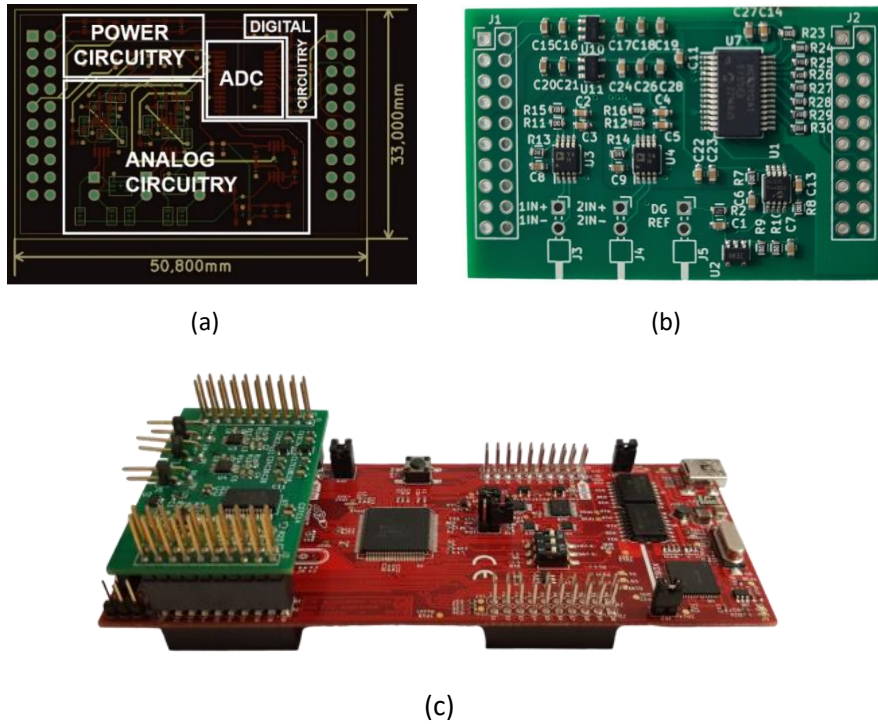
EMG acquisition system layout (a) PCB layout (b) final solution (c) board plugged-in the MCU.
